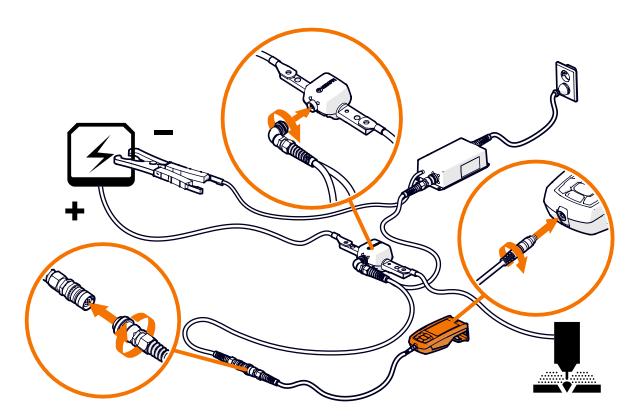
Connecting ARC SAW Adapter and Smart Reader to a welding machine
